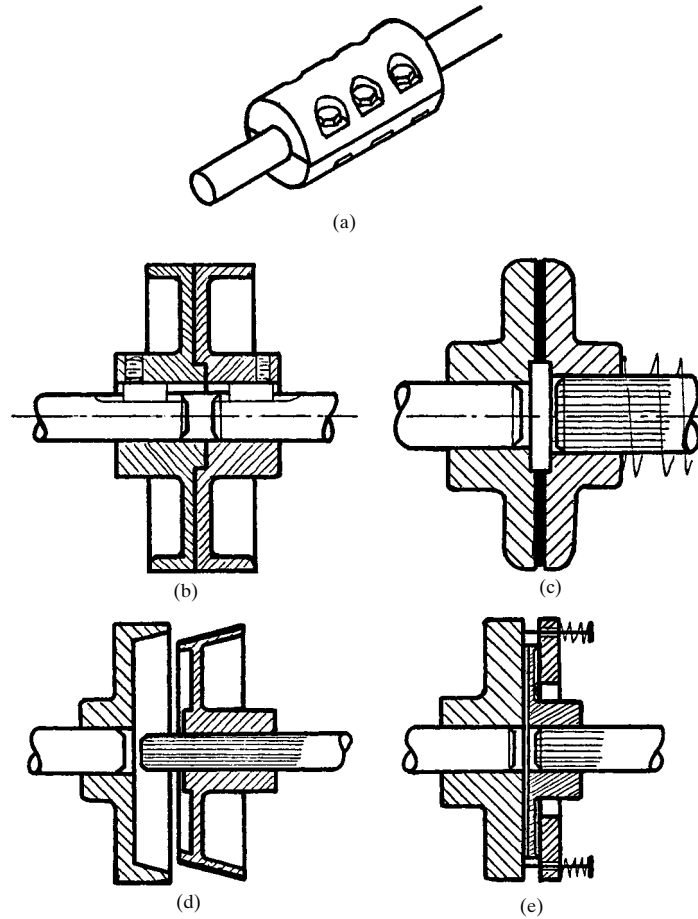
Couplings and connectors—axial. These are used to connect co-axial shafts. (a) Rigid coupling; (b) flanged coupling; (c) disk clutch; (d) cone clutch; (e) plate clutch.
